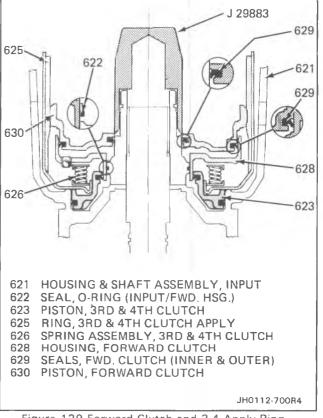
Forward Clutch and 3-4 Apply Ring -Installed
